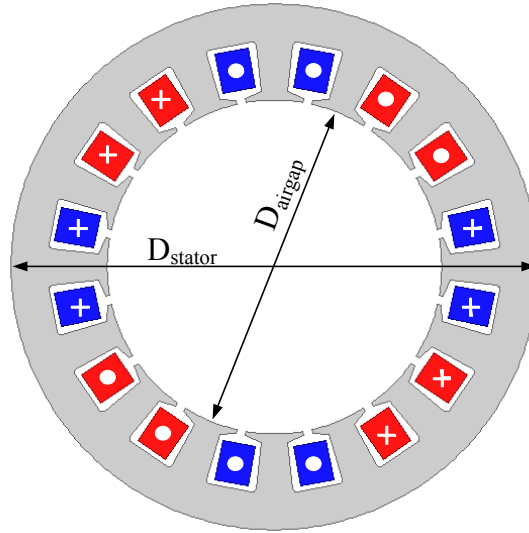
Stator geometry and winding configuration of the SynRM used for the machine design.
